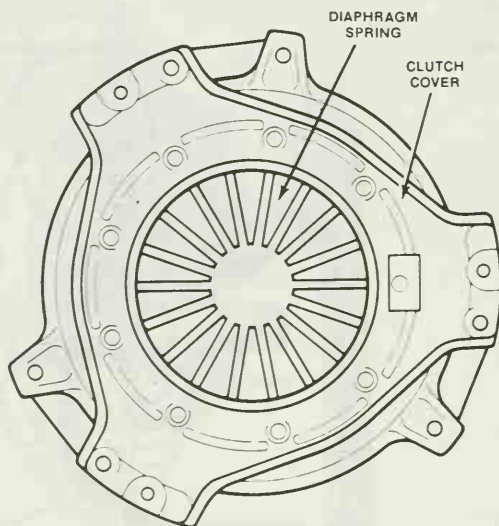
Diaphragm-spring pressure plate assembly. (American Motors Corporation)
